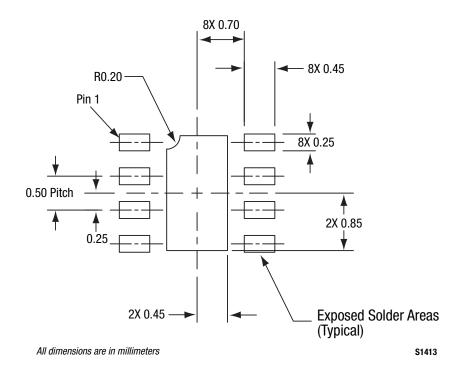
SKY67159-396LF PCB Layout Footprint (Top View)
